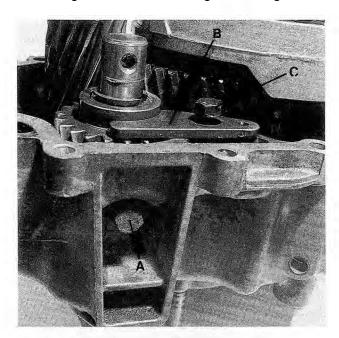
Reverse gear shaft retaining bolt (A), retaining bracket (B), and bracket mounting bolt (C).
